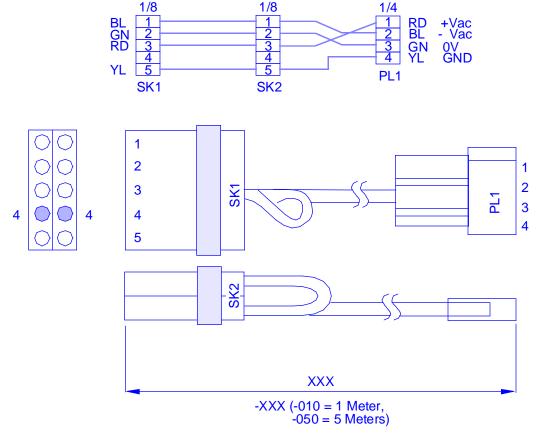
Extension Cable G022H005-xxx for MAU-1A/BP When Used in UK Installations (USS-1-AC)
